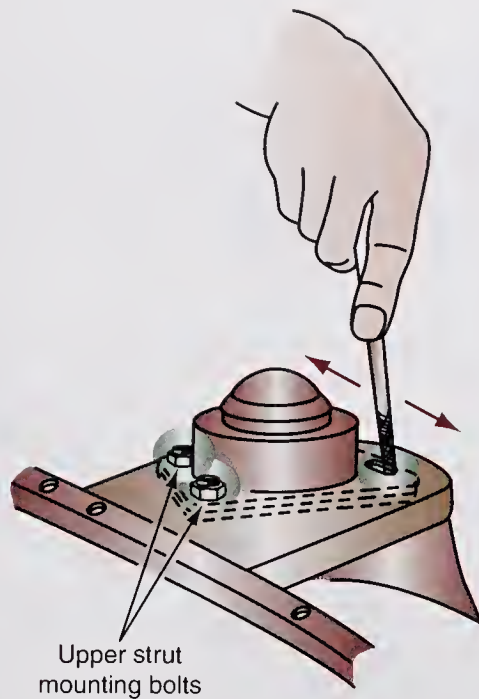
Elongating upper strut mount bolt openings to provide caster adjustment.
